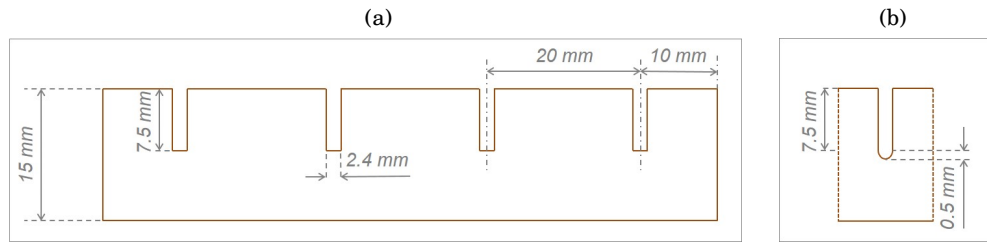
Schematic drawing of core strips geometry. The total width of the strip is not indicated as it depends on the IP dimensions of core specimens.
